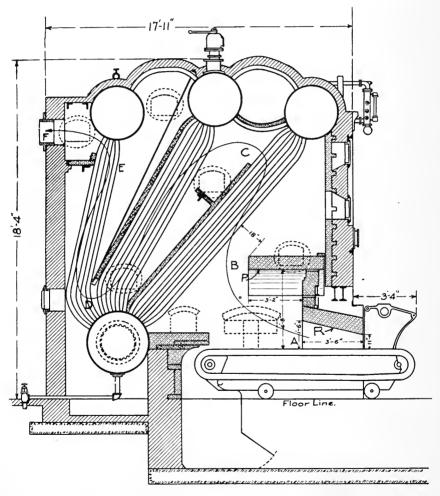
Stirling Standard 260 H. P. Boiler Equipped with Chain Grates
